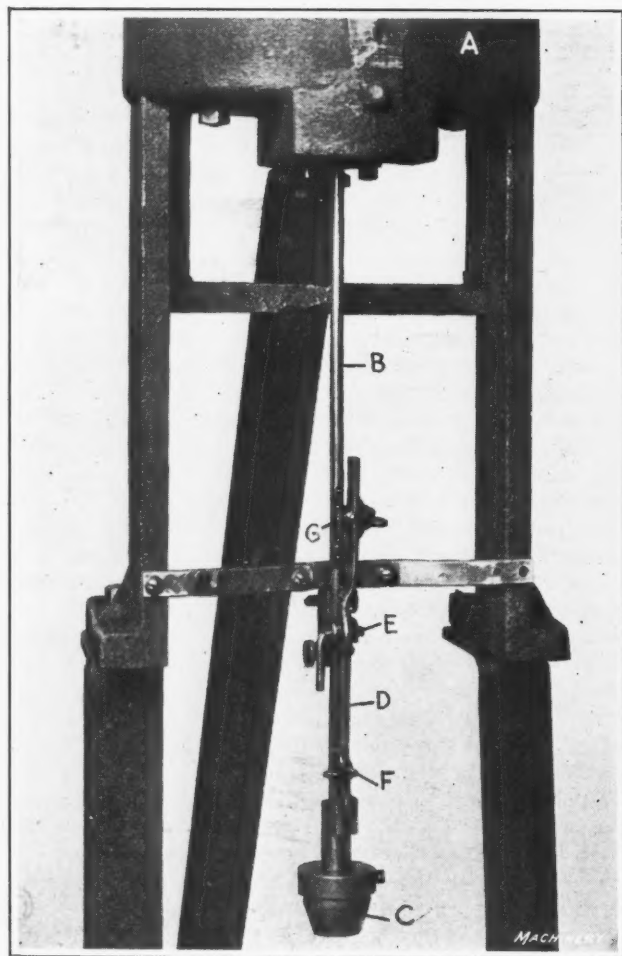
Loading Machine for depositing Caster Bearing Balls in the Shell
